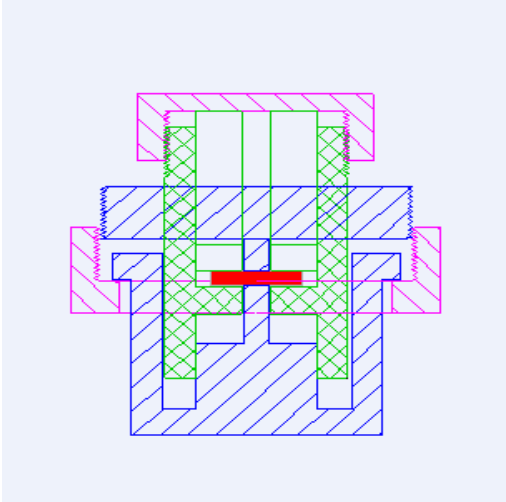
2 Drawing showing the assembled puncher tool (Stenebråten et al., 2008)
